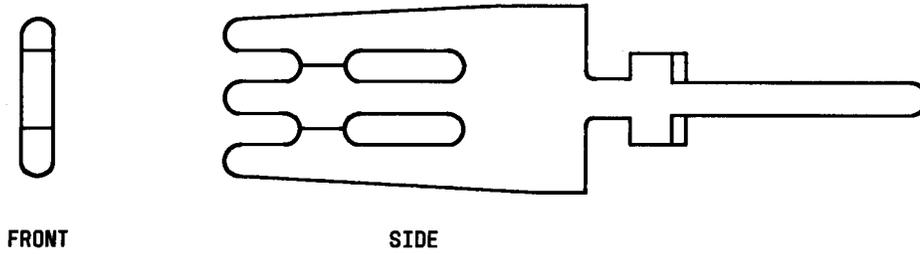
Views of Terminal Used on 112-Type Connecting Block
